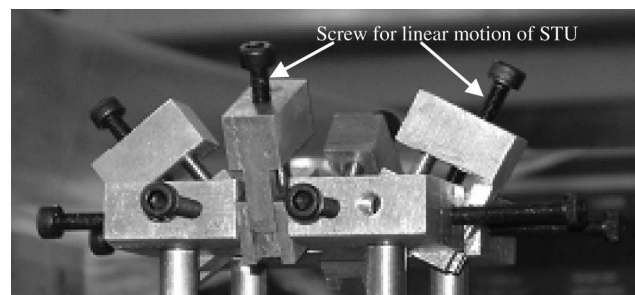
Linear motion of part A of STU against part B using M2 screw.
